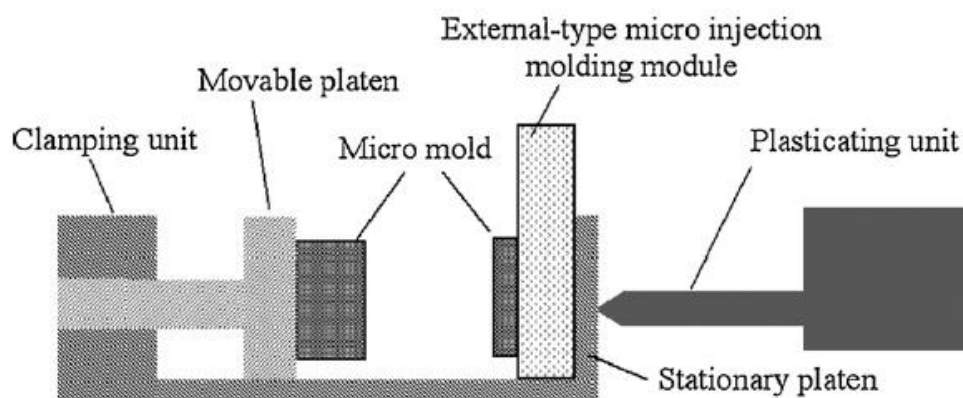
1. Schematic of the external-type micro-injection moulding module (Chang et al., 2007).
